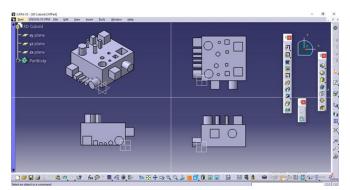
Test Specimen (Tolerance Gauge) 3D model in CATIA
